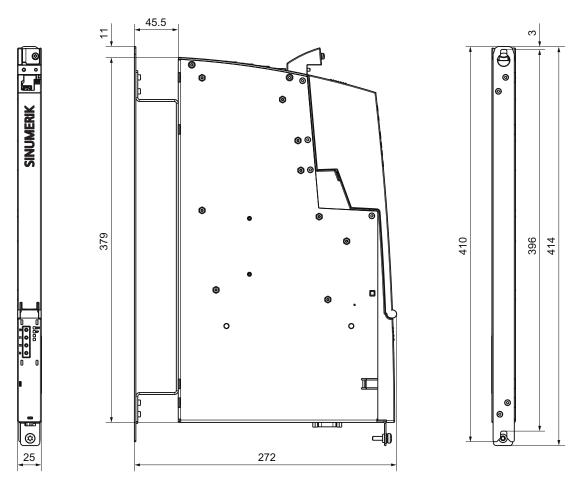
NX10.3 / 15.3 dimension drawing (dimensions in mm)
